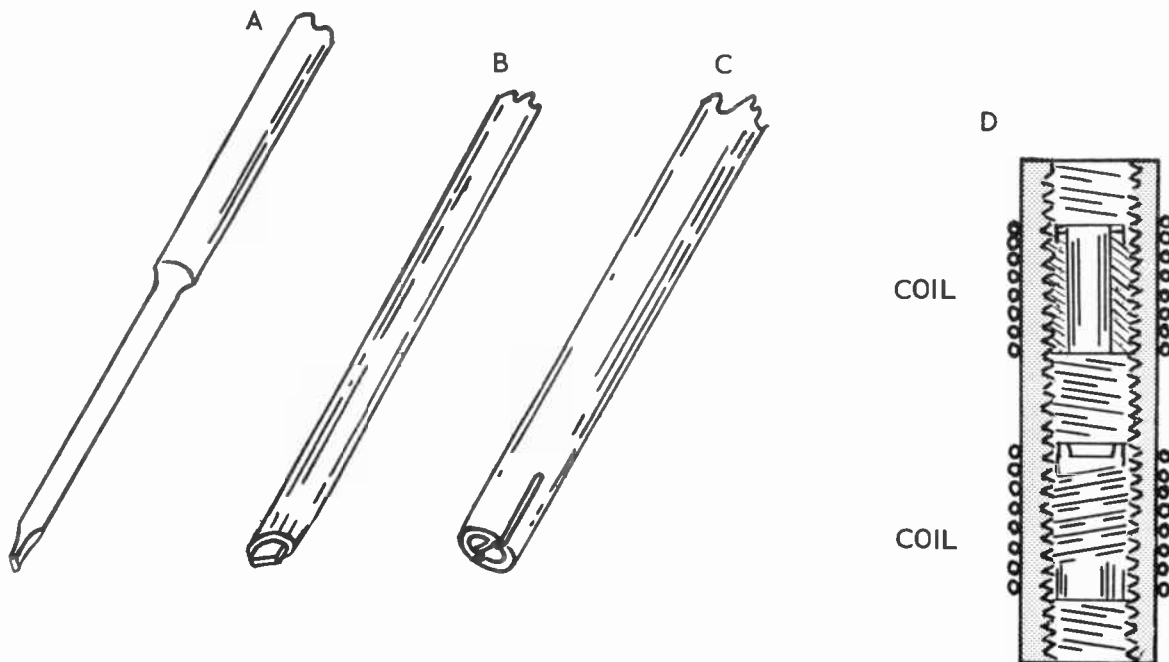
Alignment tools with screw driver tips (left), and one type of double core adjustment (right).
